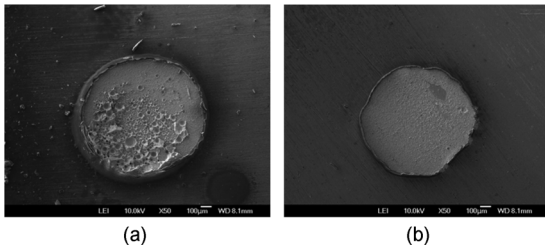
Fracture surfaces of tensile test specimens at (a) $v = 0.15$ m/s and (b) $v = 1.26$ m/s.
